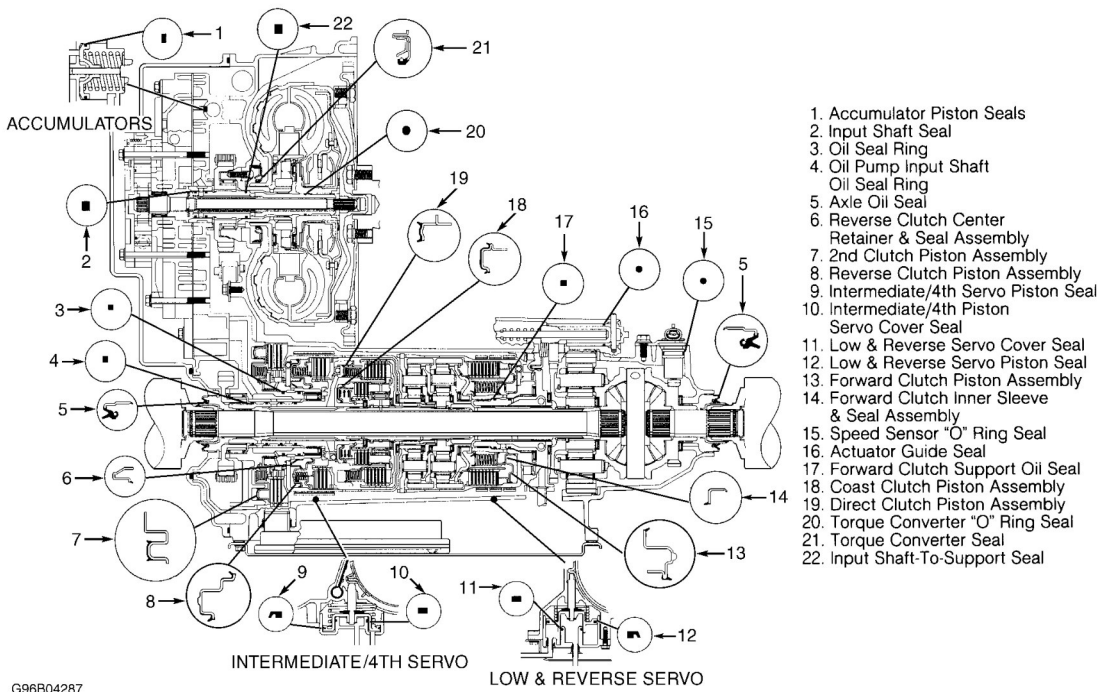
Identifying 4T40-E Seal Locations & Installation Direction
